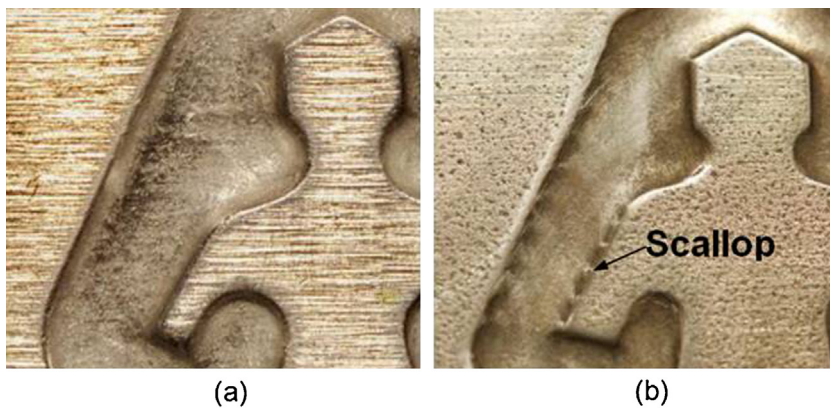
Pockets machined using zig-zag tool paths and different step-over distances (a) 0.1 mm and (b) 0.3 mm.
